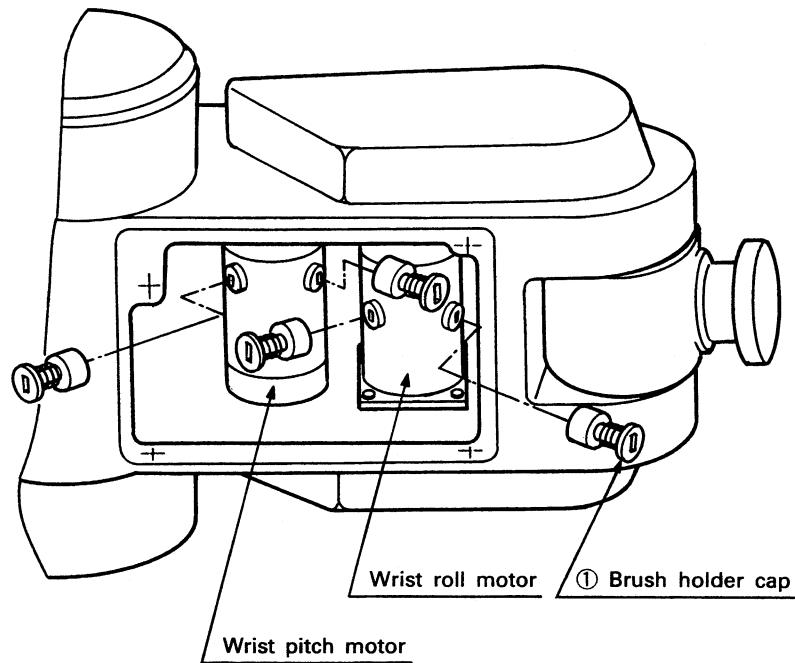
Checking and Changing the Wrist Pitch and Wrist Roll Drive Motor Brushes
